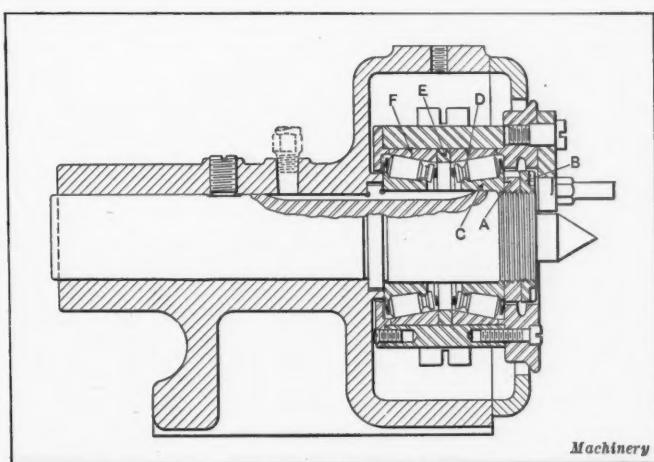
Application of Tapered Roller Bearings for carrying Headstock Spindle of Grinding Machine
